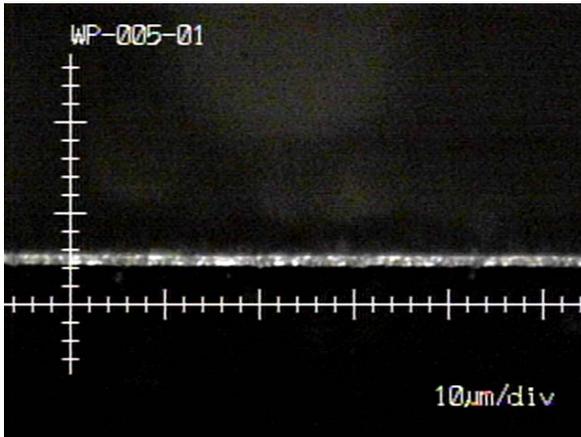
Blade used to cut ChoiceDek material prior to cutting.
